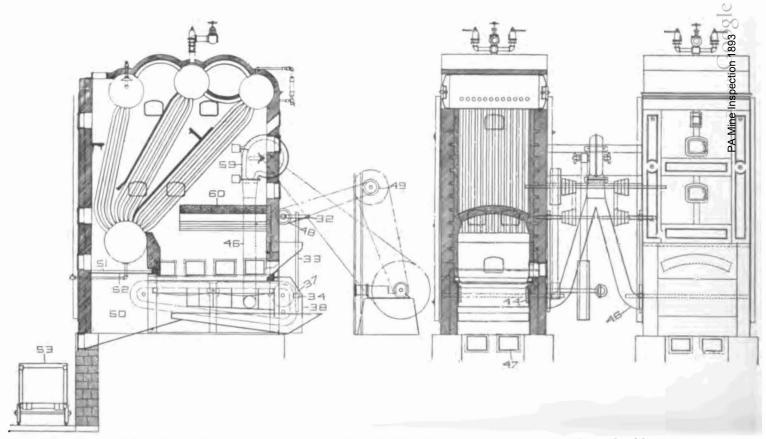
PLATE IV.—Side and transverse elevation of the Stirling boiler plant at No. 3 Colliery, Oneida, Pa.
